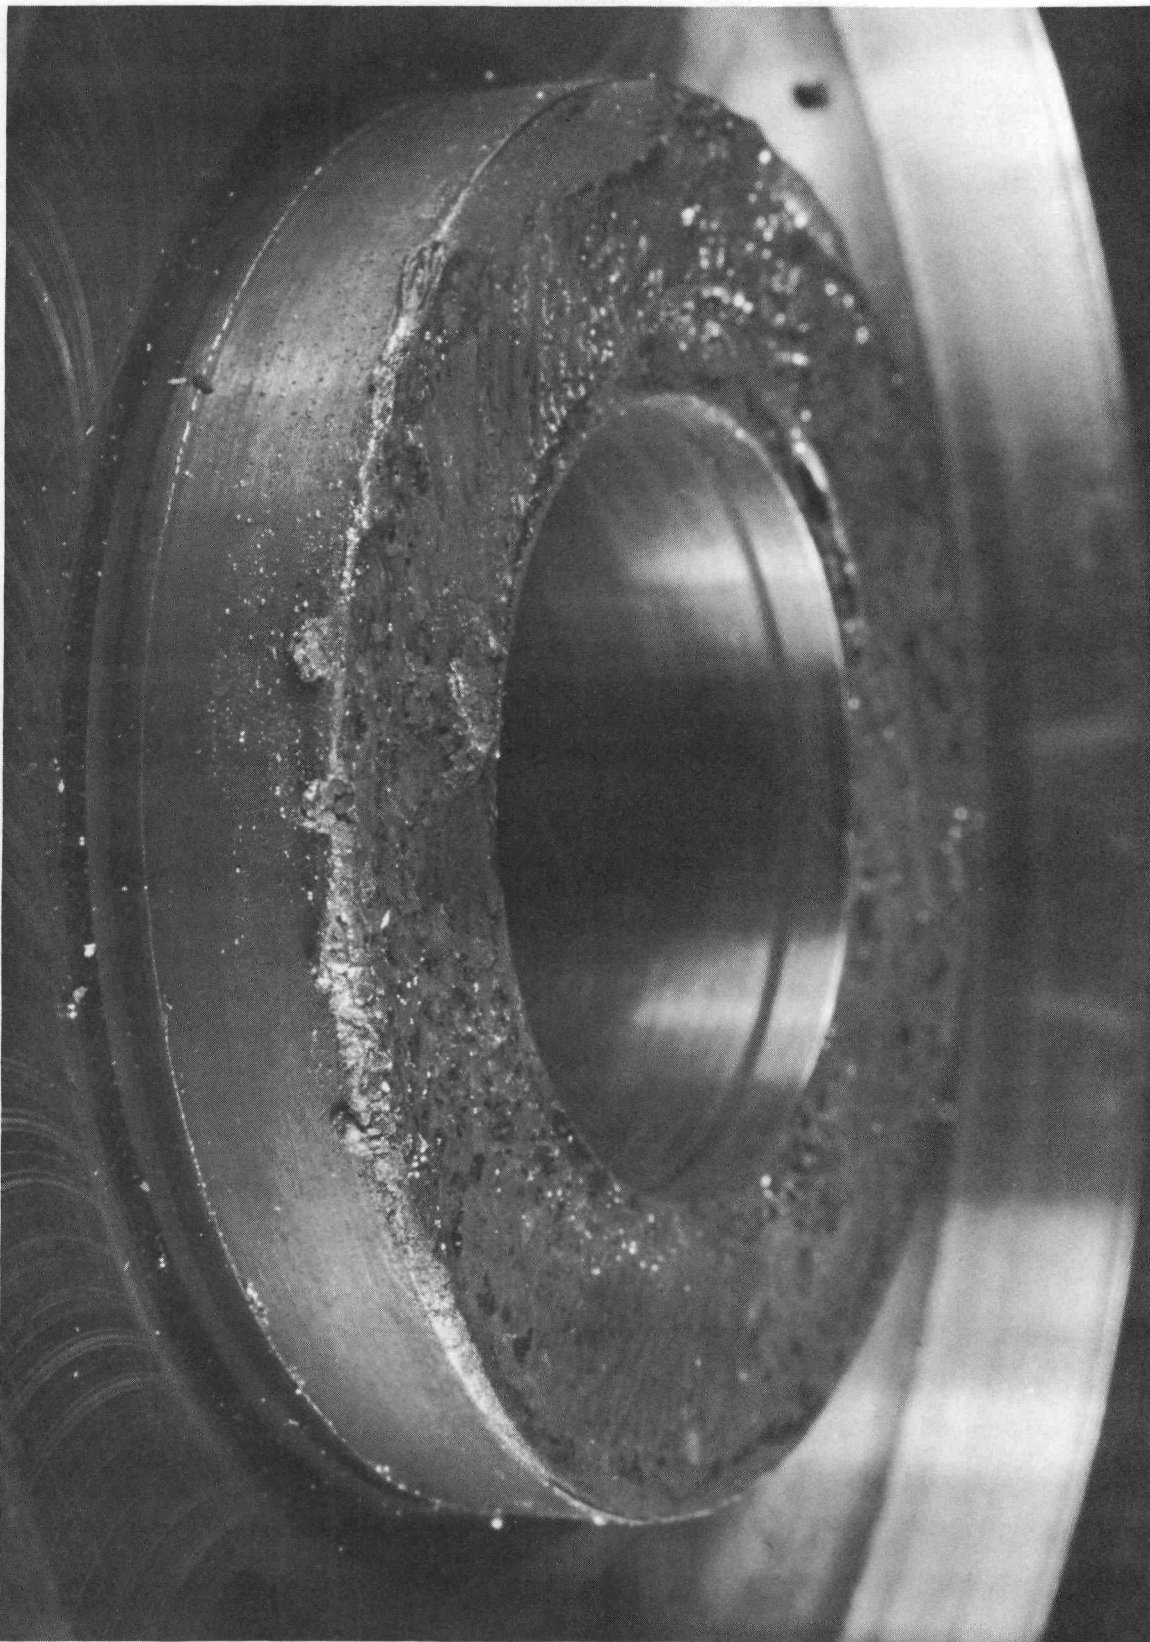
Corrosion Product Deposition on Turbine Housing (Pump End)
